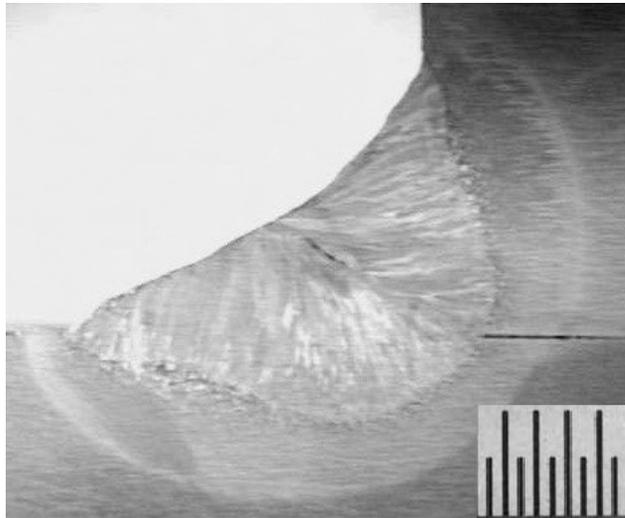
Transverse cross section of a CTS-tested weld. The crack is shown at the weld top under the surface. Distance between scale bars corresponds to 0.5 mm.
